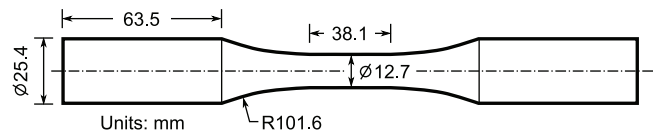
Dimensions of the samples used for uniaxial tests in this study.
